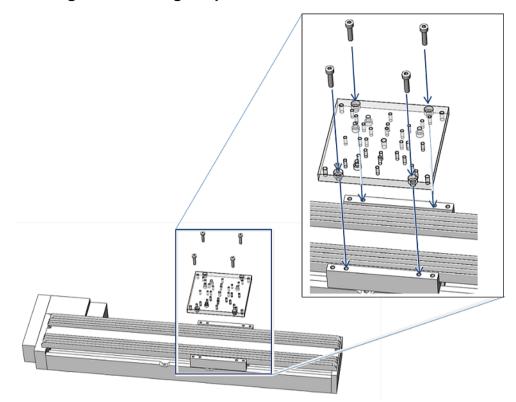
Affixing the mounting adapter (shown transparent) to the sled
